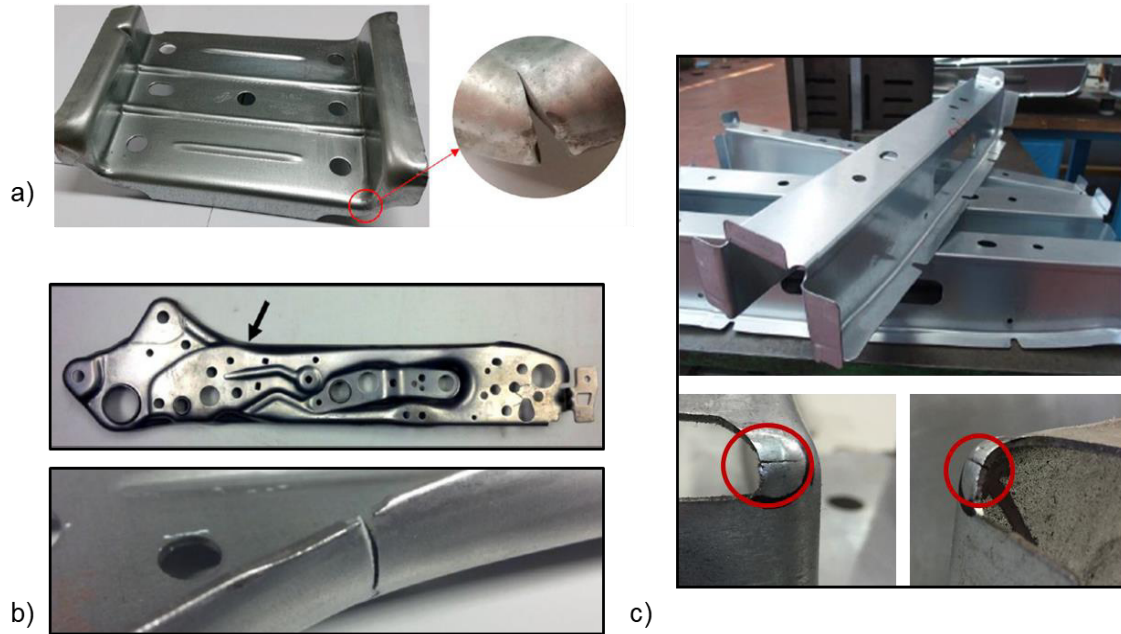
Examples of edge cracking in cold formed automotive components. a) body in white stamped part. Material: DP600 [45]. b) Automotive seat component. Material: DP980 [67]. c) Under seat beam made of DP980. Images courtesy of Centro Ricerche Fiat (CRF).
